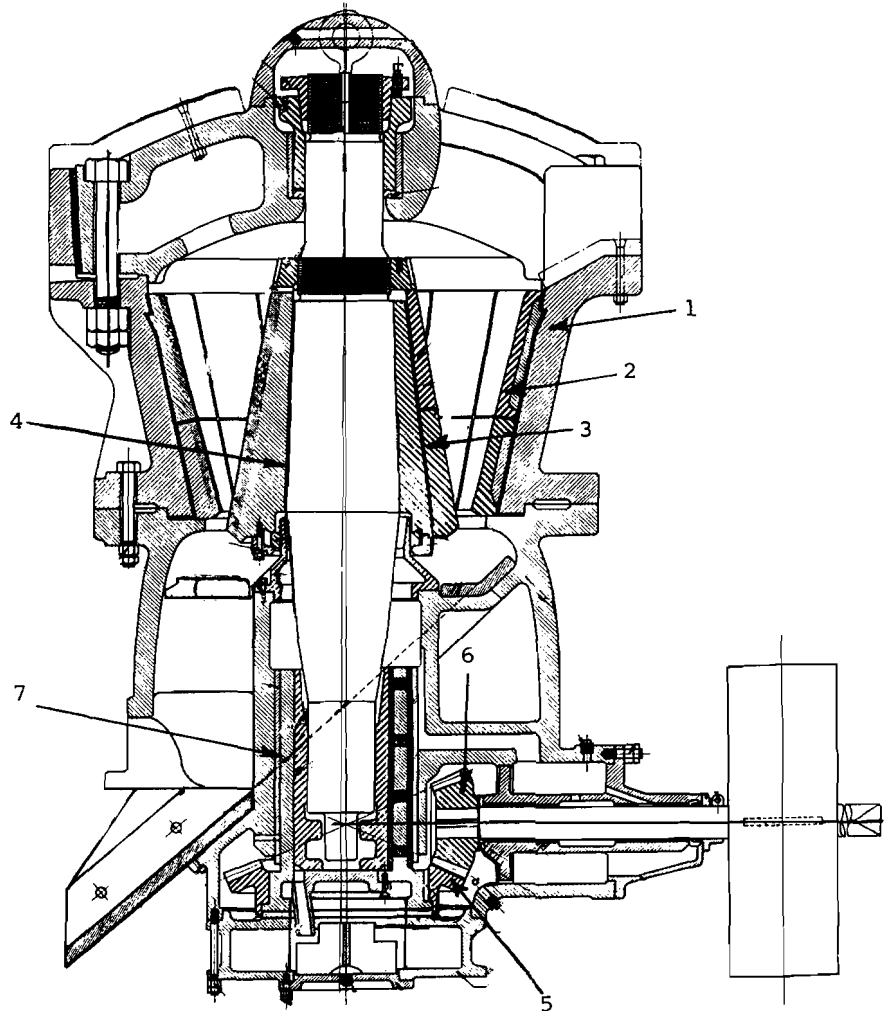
Sectional view of short-shaft suspended gyratory crusher (courtesy of Fuller Co.). Legend: (1) main frame or top shell, (2) concaves, (3) mantle, (4) main shaft, (5) gear, (6) pinion, (7) eccentric.
